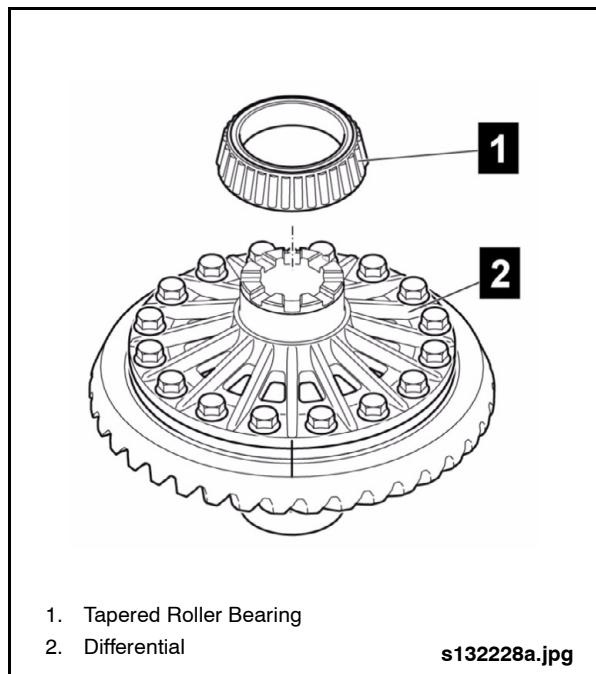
Installing Tapered Roller Bearing on Lock Side
